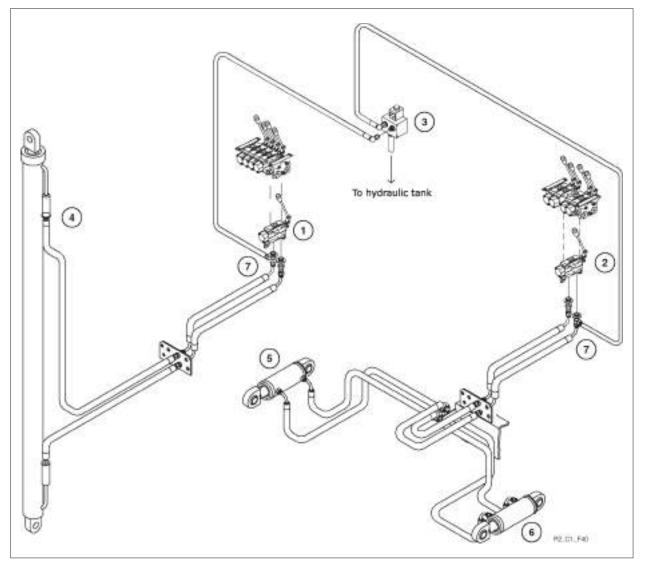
A. M8 / M50 LOWER AND GO HYDRAULIC SYSTEM COMPONENT LAYOUT
